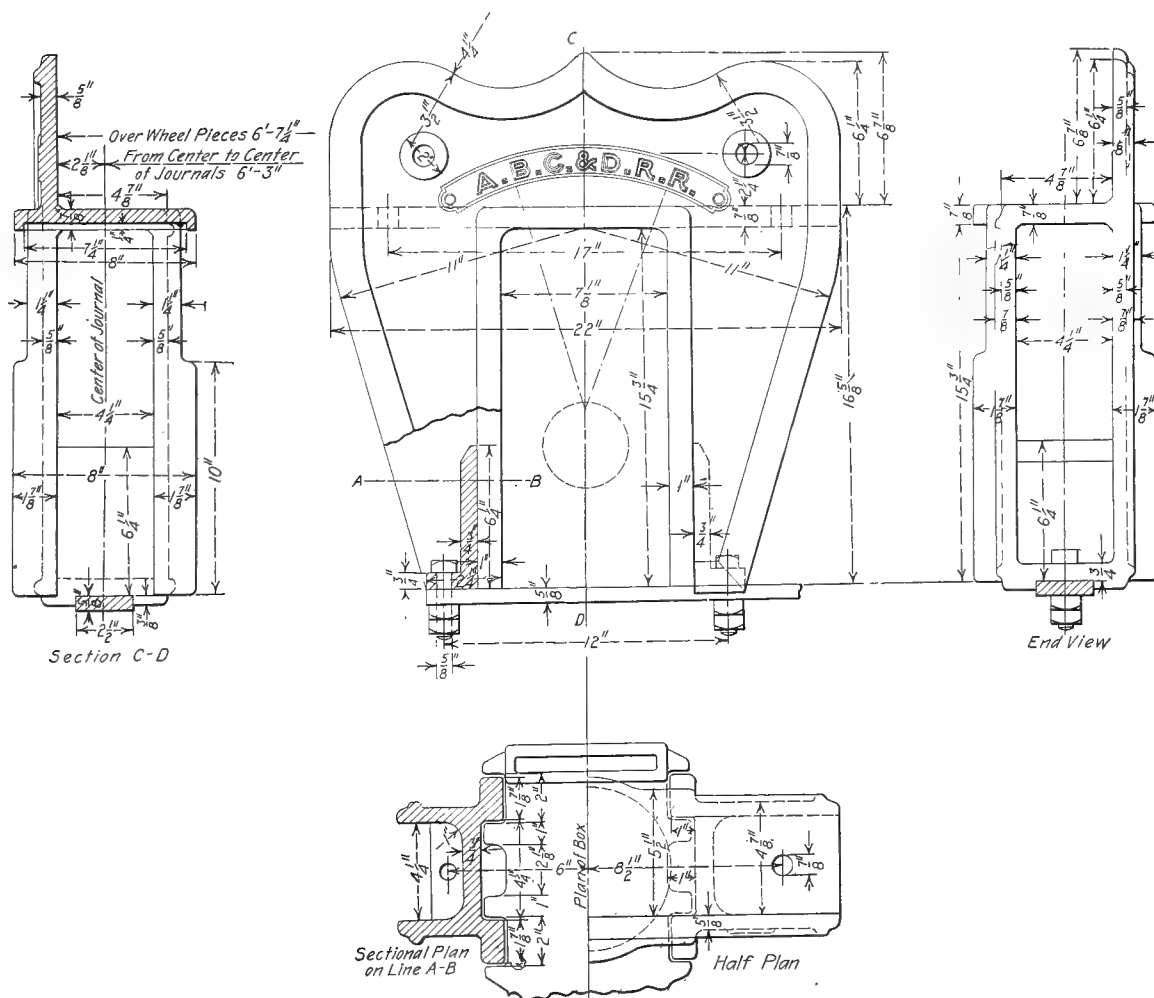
M. C. B. Standard Pedestal for 3¾ in. by 7 in. Journal. (M. C. B. Sheet 21.)
